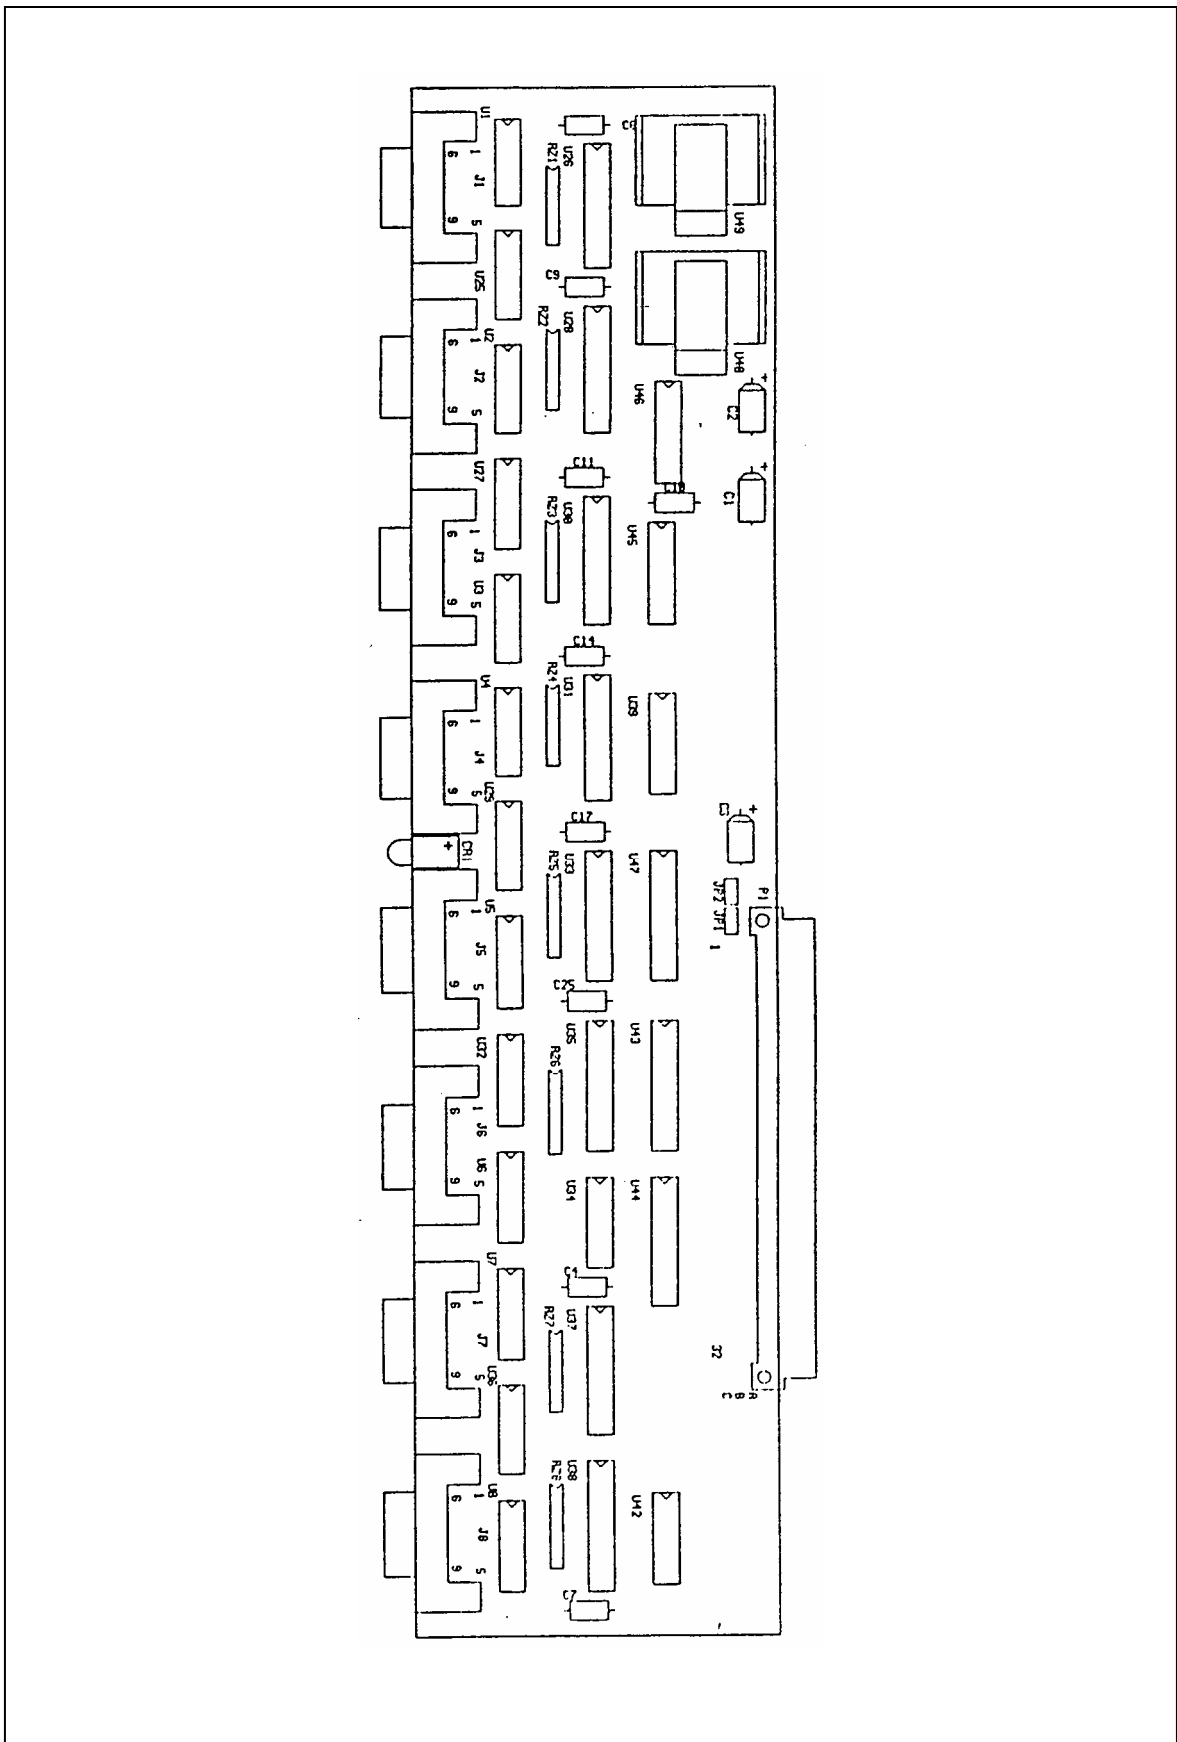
Component locator drawing, RFL 96 MSM I/O RS-232 Device Port Module
